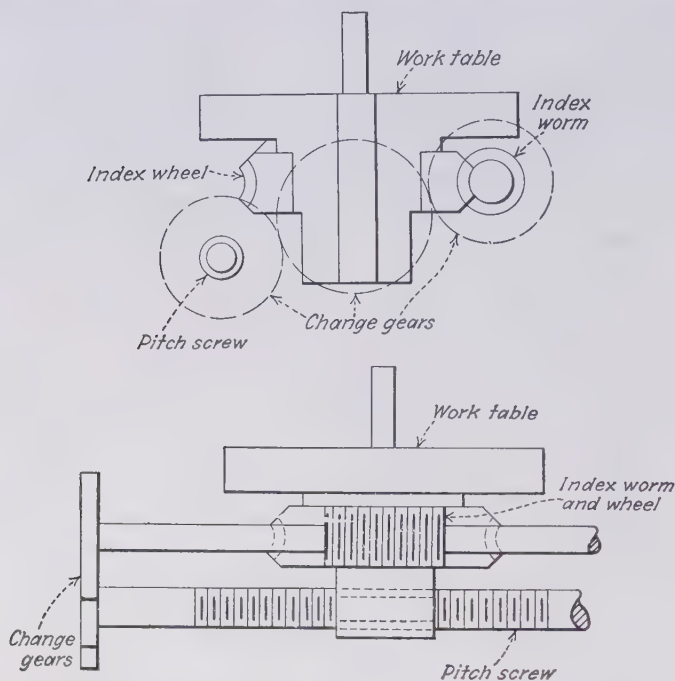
Elements of the generating mechanism of a rack-type gear shaper.
